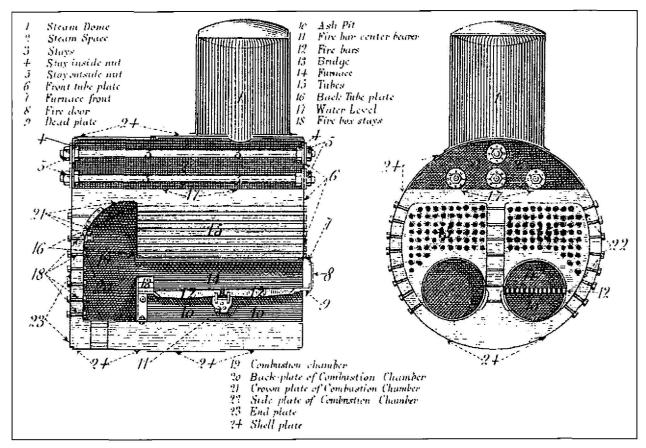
Boiler design and nomenclature. This illustration displays the side and front view of a tubular boiler, the former in cross-section in order to depict the tubes, furnace, combustion chamber, and other interior features (as presented in Paasch 1885).
